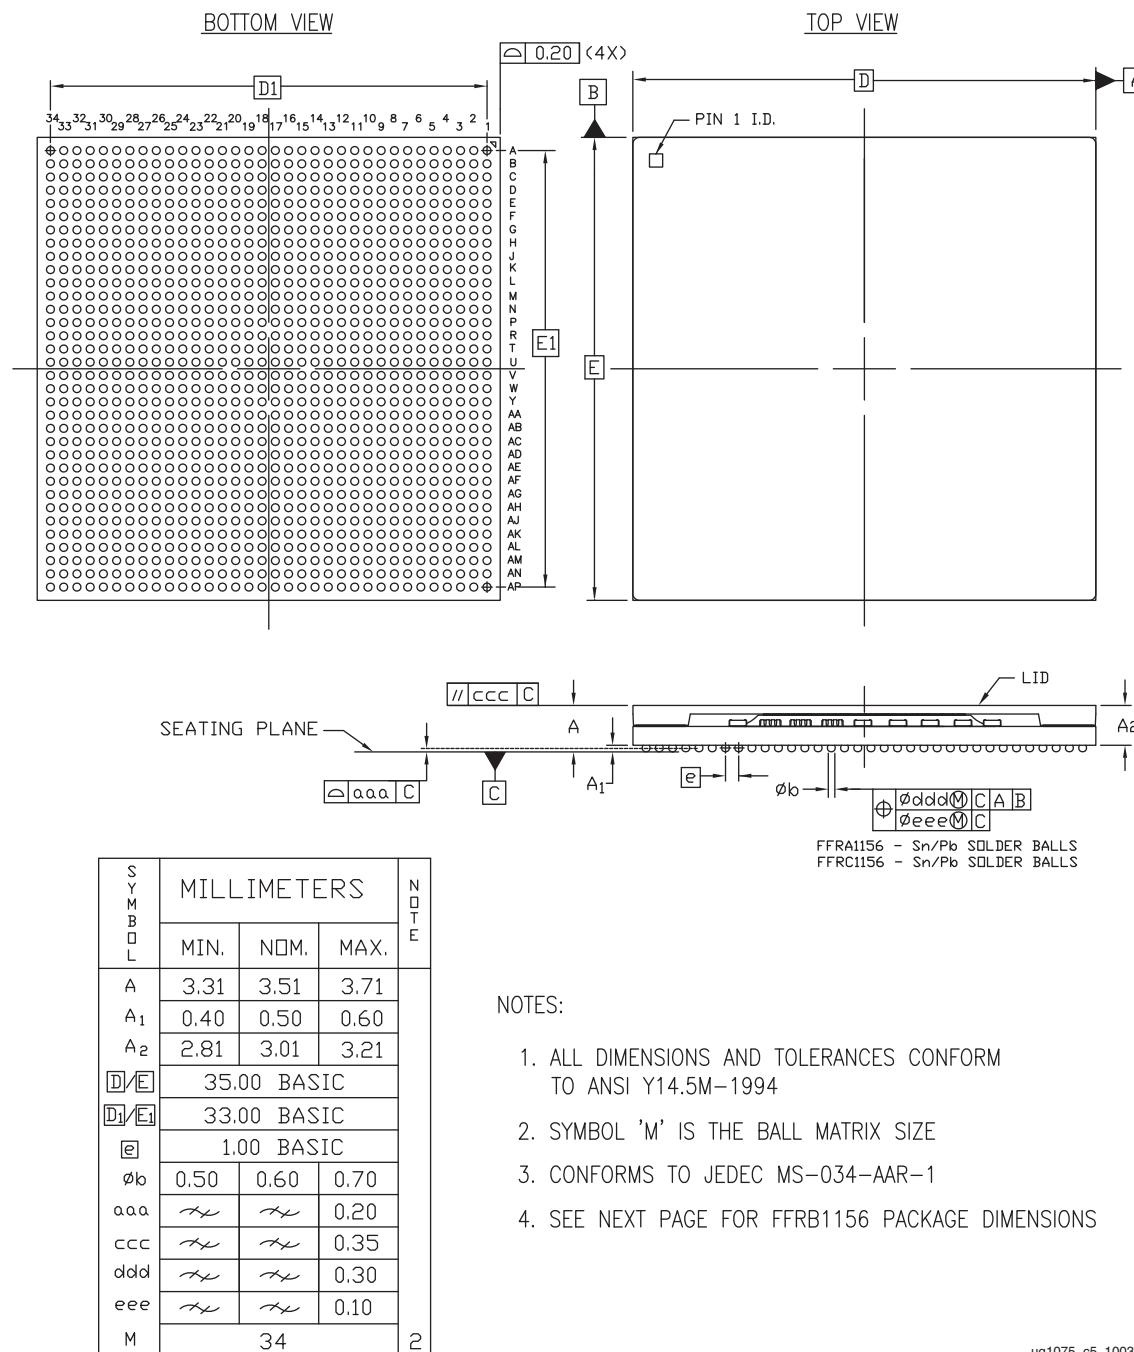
Package Dimensions for FFRC1156 (XQZU7EV and XQZU11EG)
